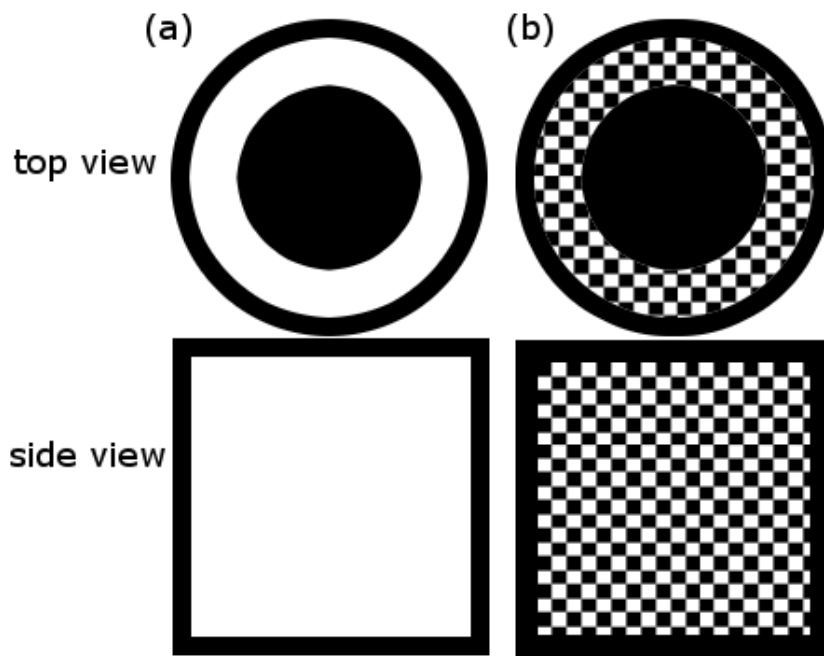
Schematic of hollow cylinder design used to investigate methods to reduce defects in LAMP components subjected to binder burnout and sintering. (a) shows an all white exposure technique and (b) shows a staggered checkerboard exposure technique
